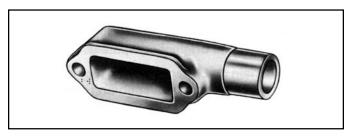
COMPRESSOR INTAKE ADAPTER
